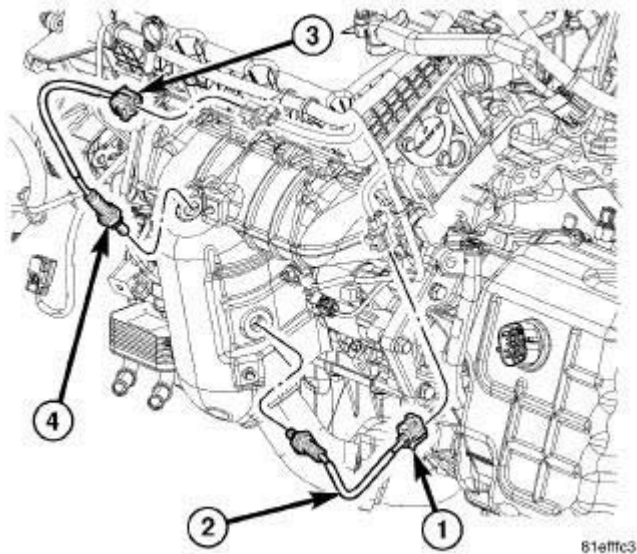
Harness Connector From Front Maniverter Oxygen Sensor
